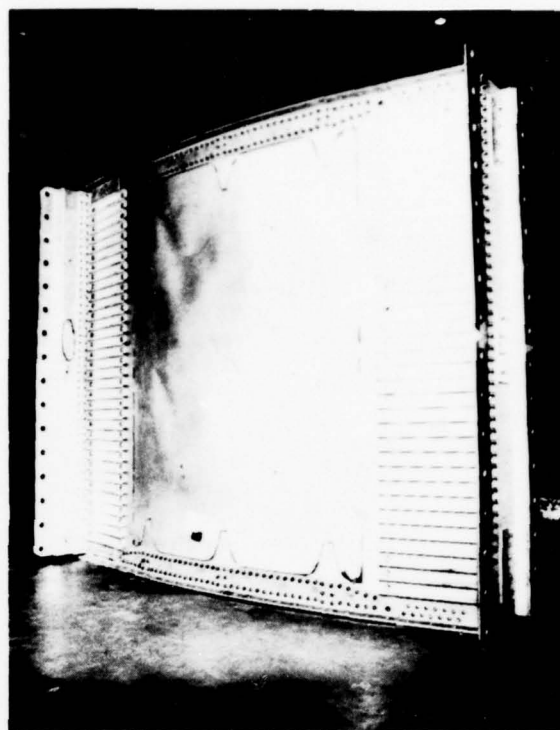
SHEAR-TENSION FAILURE - FRONT VIEW
